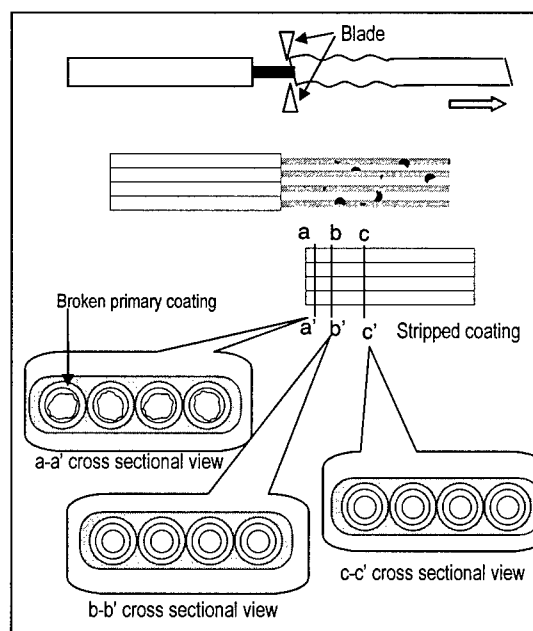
Sketch of the stripping process and the sectional view of stripped coatings
